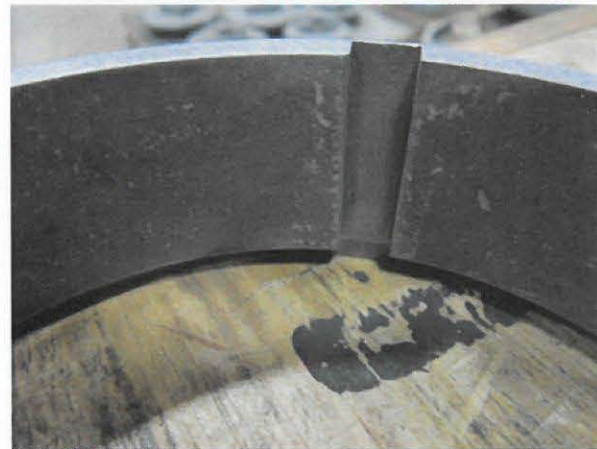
Fretting In 1-2 Sleeve Fit Bore
